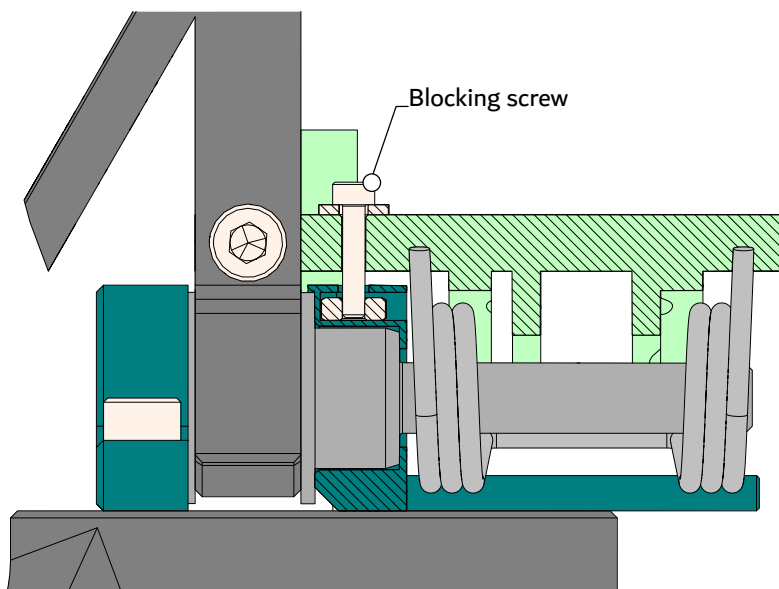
Side (sagittal plane) sectional view of the blocking mechanism.
